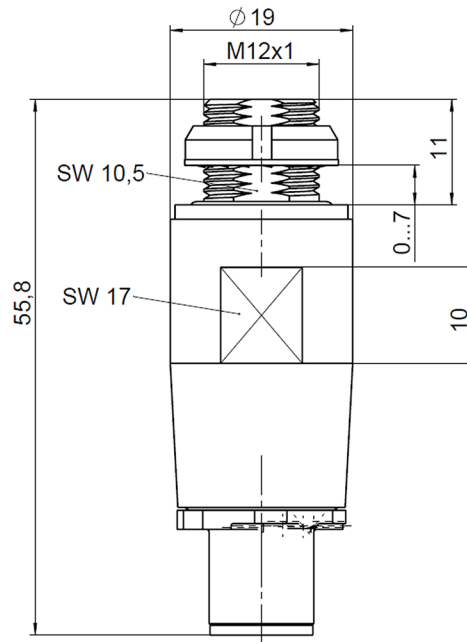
Vacuum feedthrough for the power supply of the hexapod (C887B0002), dimensions in mm
